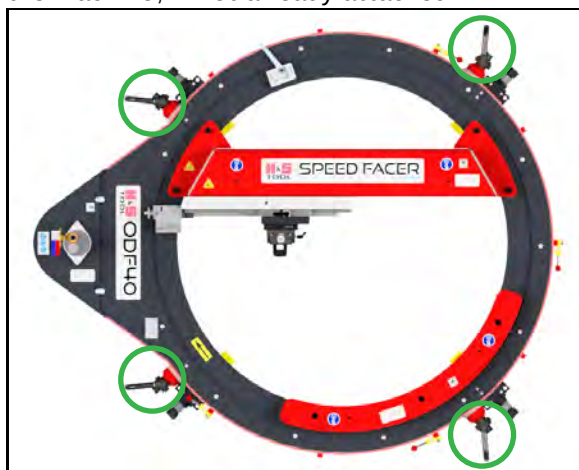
LIFTING POINTS (ODF40 MACHINE SHOWN)
